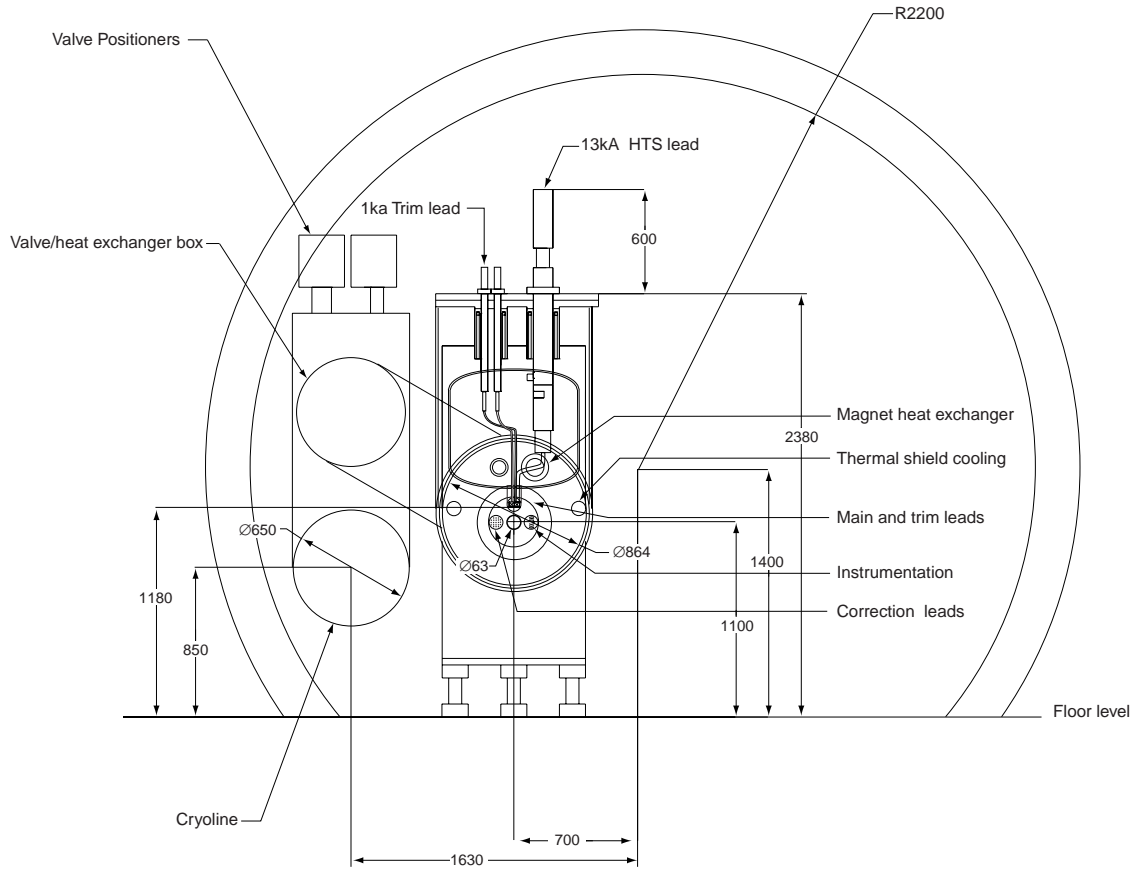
Cross section of IR8 feed box installation.
